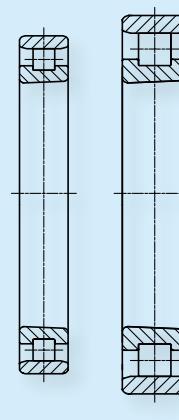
series of single-row high-precision cylindrical roller bearing
